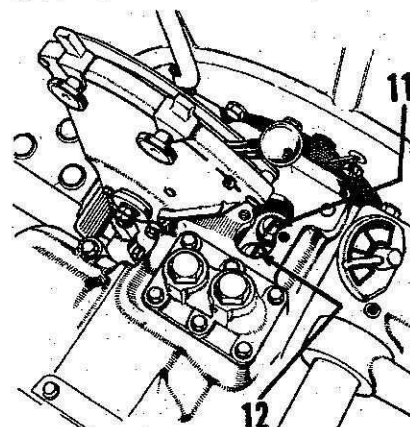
To clean nylon screen in by-pass valve plunger, remove plug (11) and withdraw the spring and by-pass plunger assembly. For exploded view of by-pass plunger, refer to items 5, 6, 7 and 8 in Fig. 198. Hold valve plunger retaining plug is (12).
